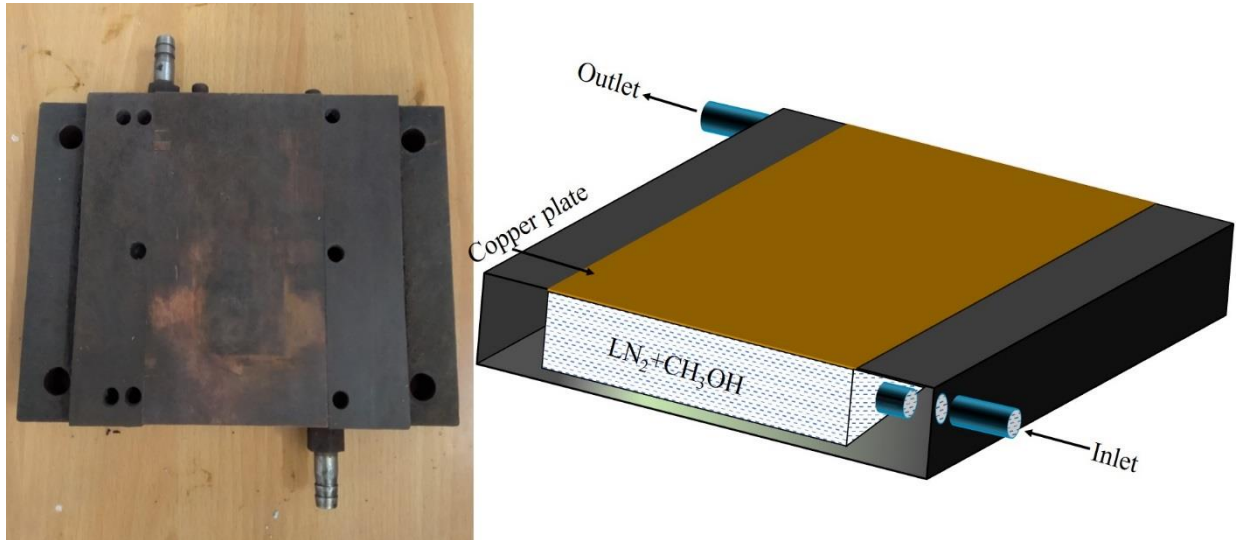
Photograph of the hollow fixture along with schematic drawing.
